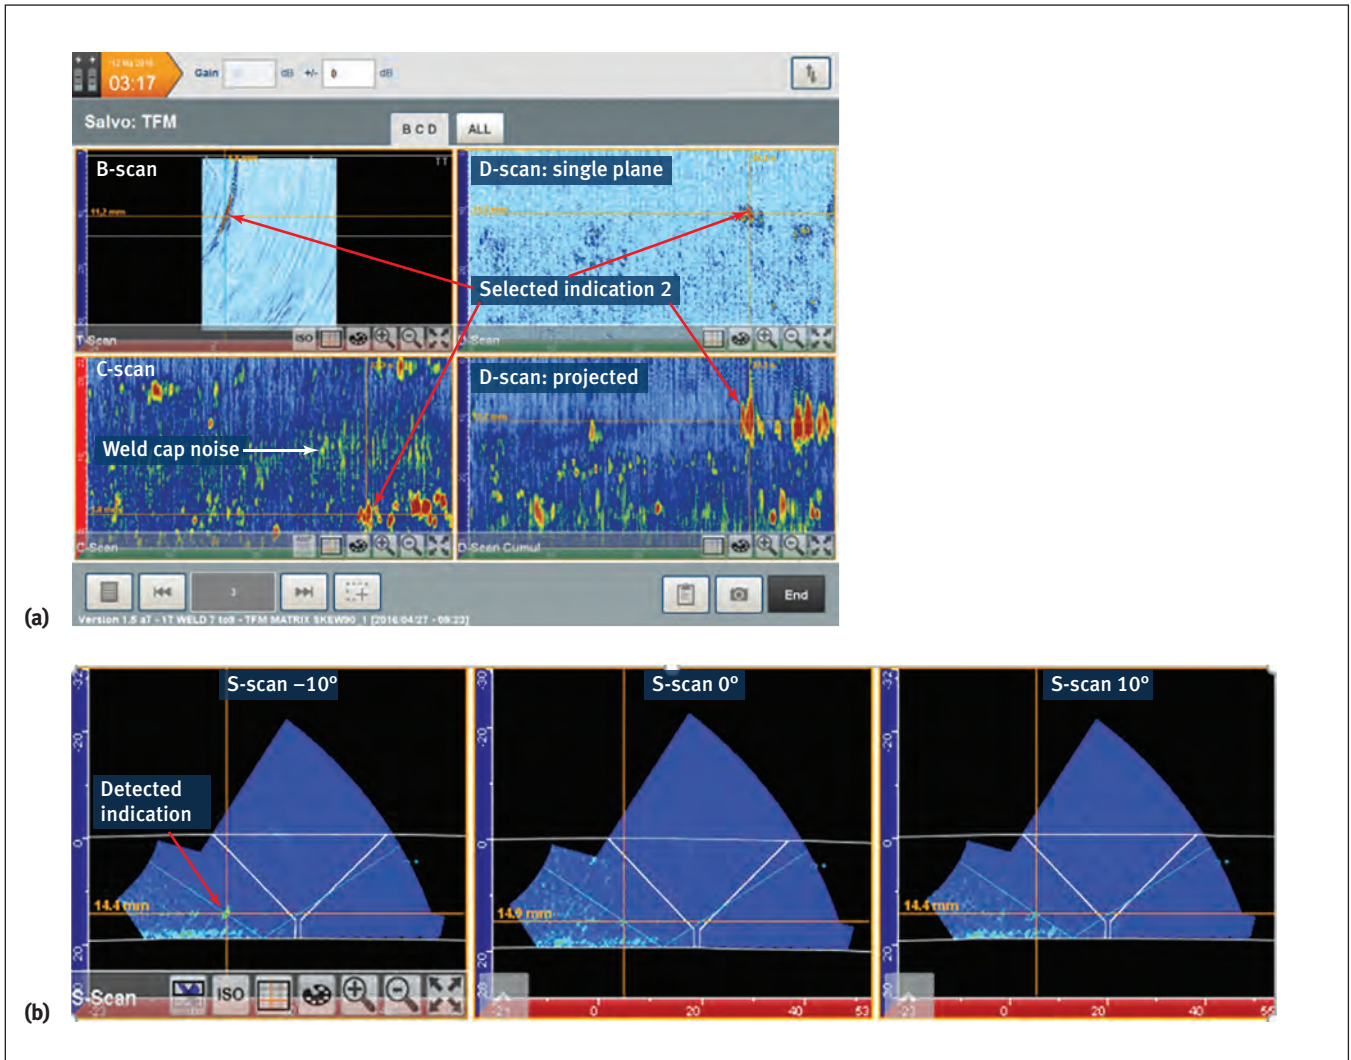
Imaging of HTHA weld damage using 10 MHz TT FMC/TFM and PAUT techniques: (a) linear probe split screen views of indication 2; (b) indication of potential HTHA damage detected in the breaking areas using matrix probe and S-scan at skew  $-10^\circ$ .
